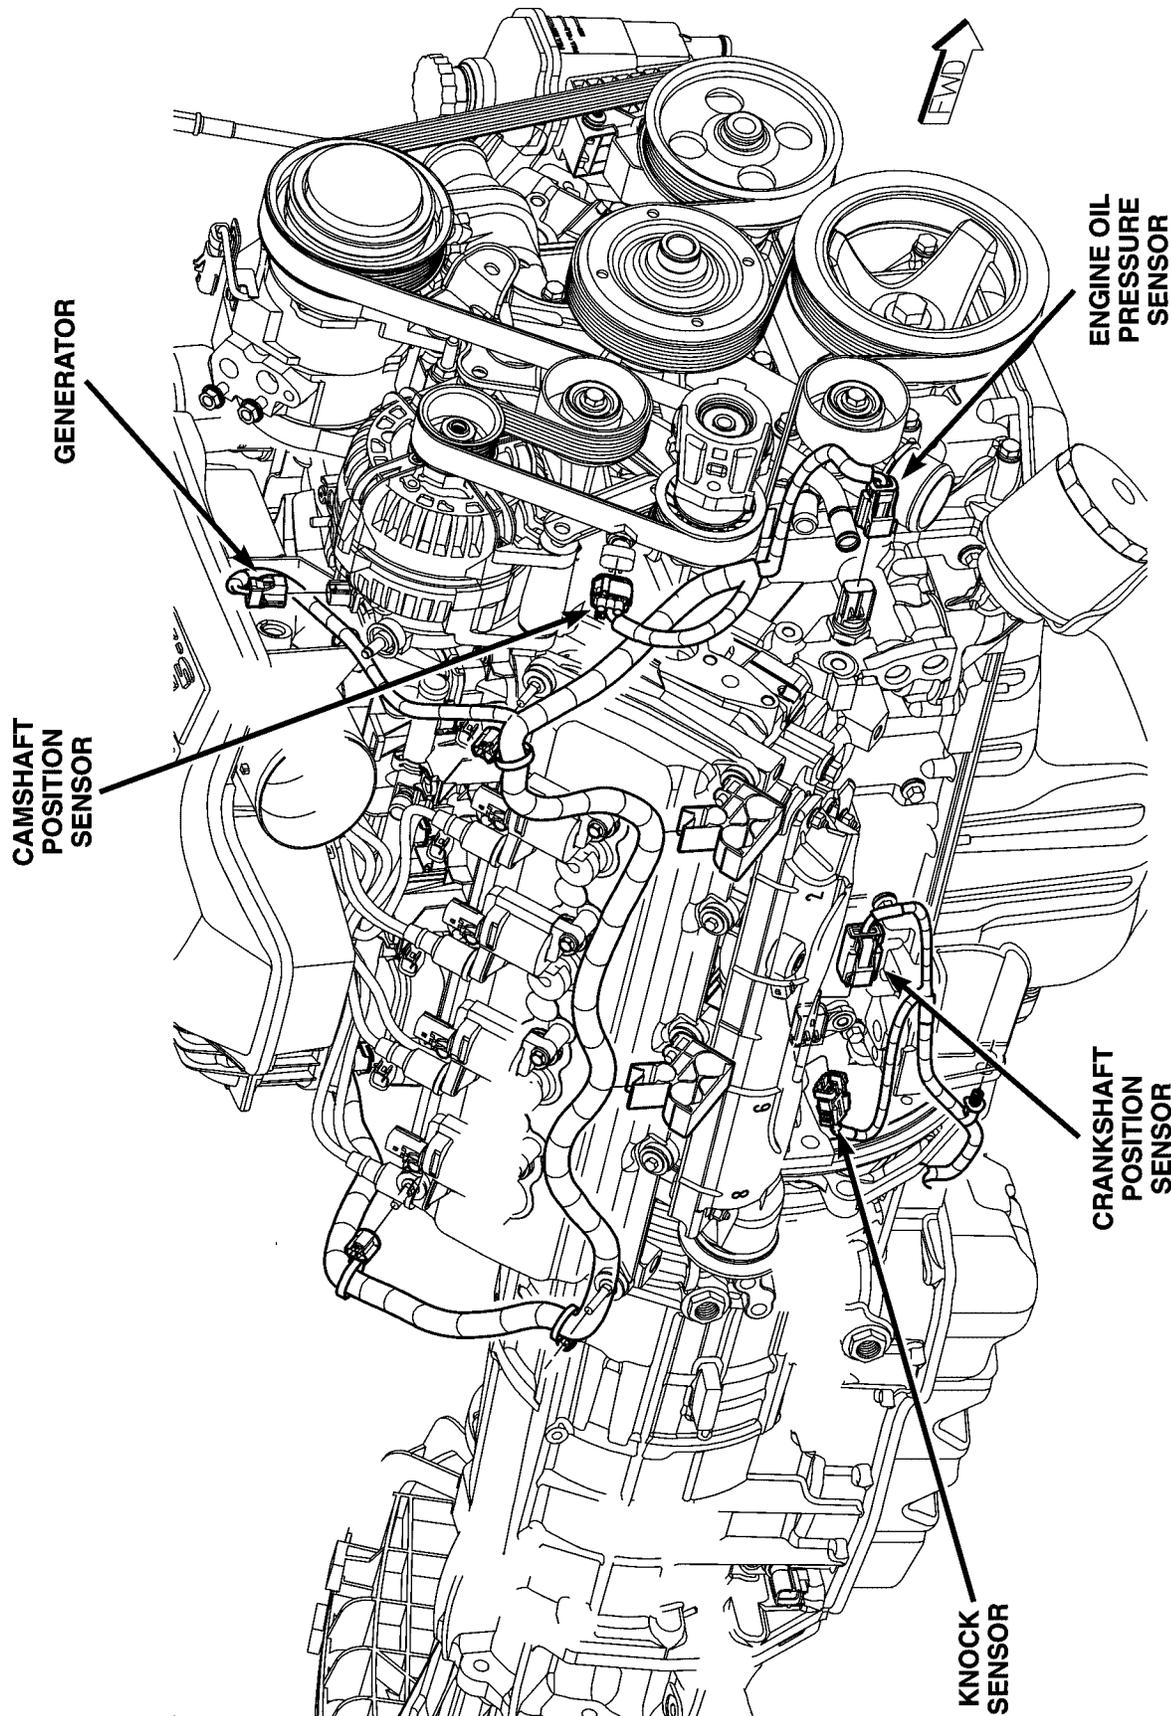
RIGHT SIDE ENGINE (5.7L)
